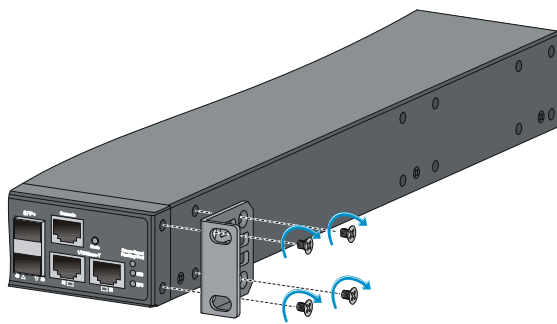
Attaching a four-hole mounting bracket to the rear mounting position on an HP 1950-24G-2SFP+2XGT-PoE+(370W)_switch
